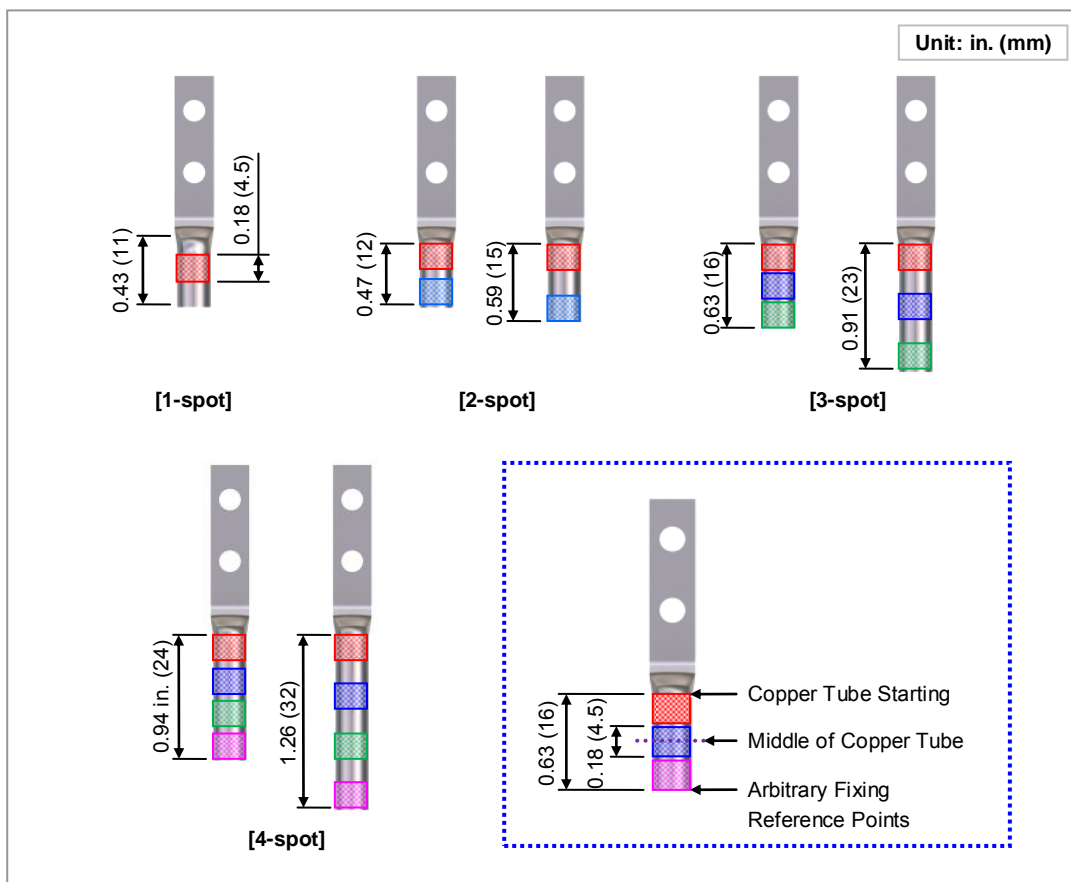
Pressure Reference Drawing (Handheld Compressor)
